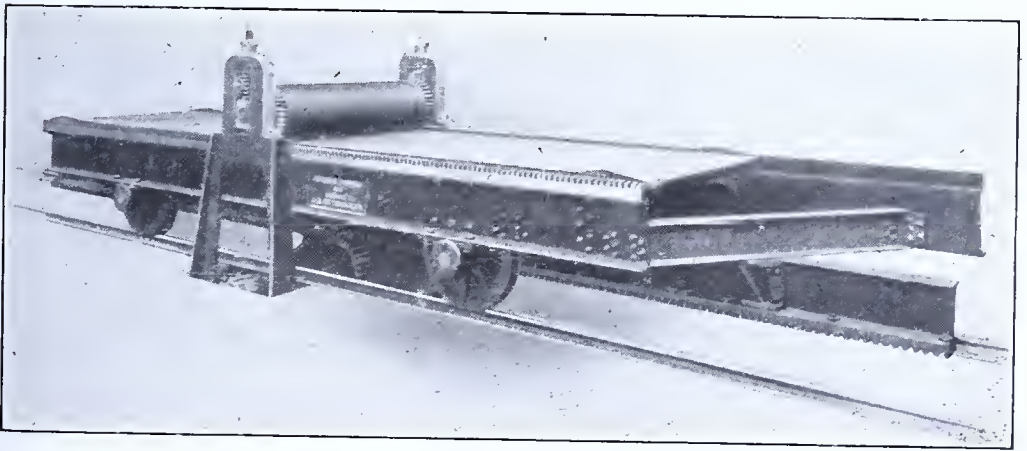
Electrically driven Glass Casting Machine for Rolling Ribbed or Figured Glass. (Rosedale Foundry and Machine Co.)
